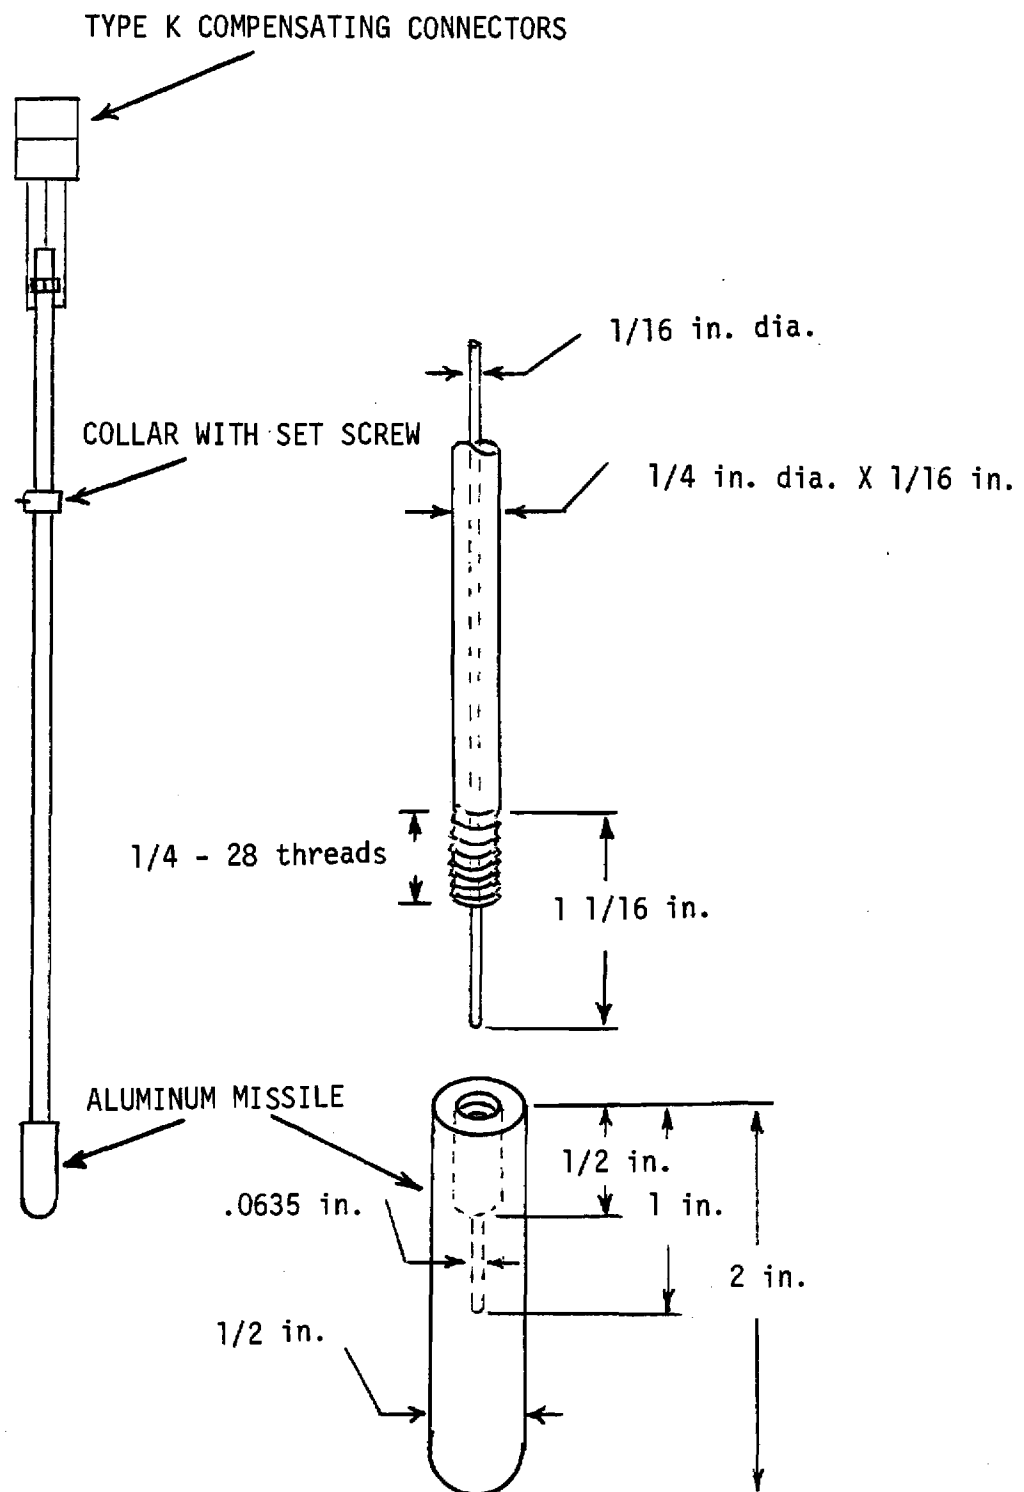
Specimen/Thermocouple/Delivery Tube Assembly.
